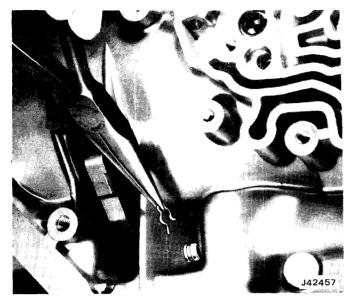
Removing—Installing Parking Pawl Shaft Retainer Spring
